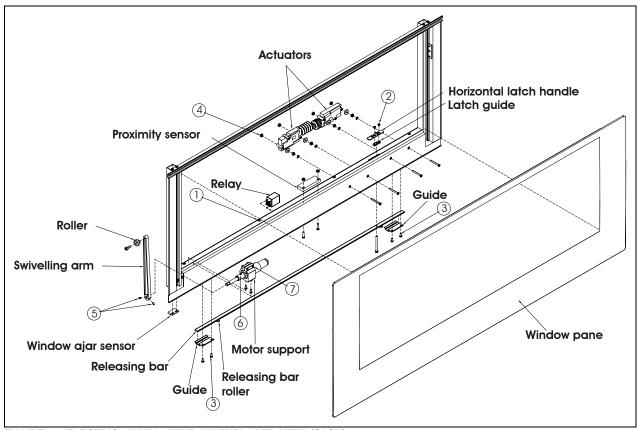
ELECTRIC AWNING WINDOW EXPLODED VIEW (SASH)
